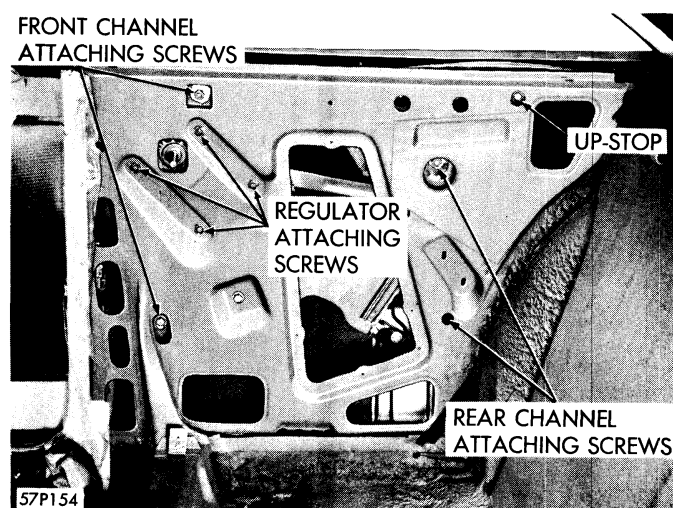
Rear Quarter Glass Adjusting and Attaching Screws
